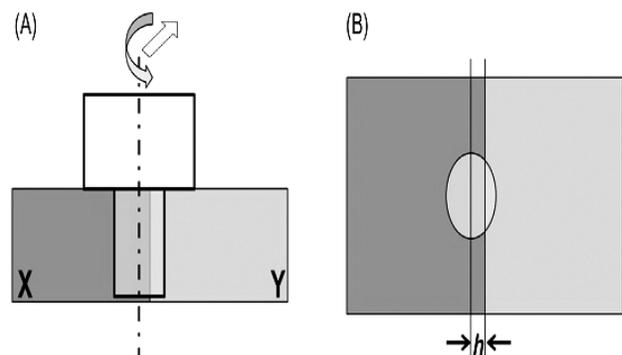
Schematic of friction stir welding (A), Top view of process (B) [21]
